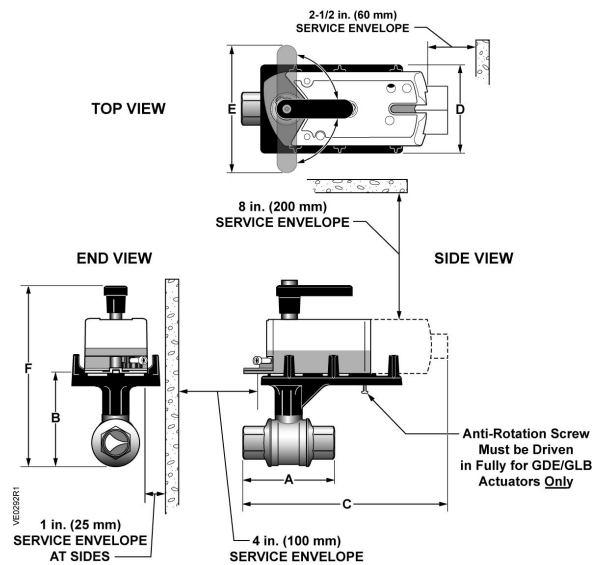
Two-Way Ball Valve and Low Profile Bracket with Actuator Dimensions in Inches (Millimeters).
